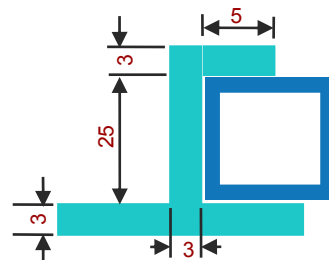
Locator dimensions for front fender panel. All dimensions are in mm.
